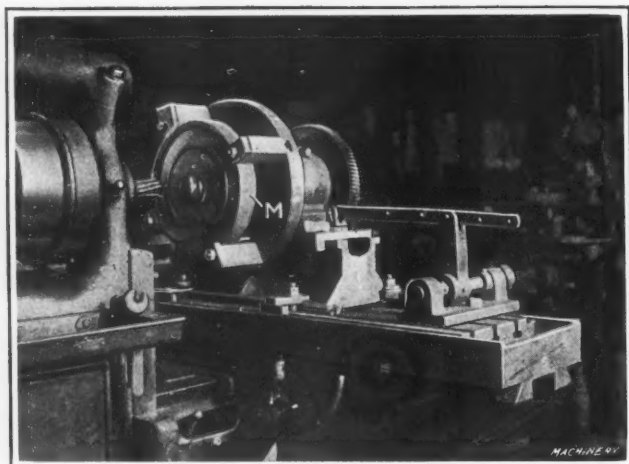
Cam Milling Attachment mounted on Milling Machine
